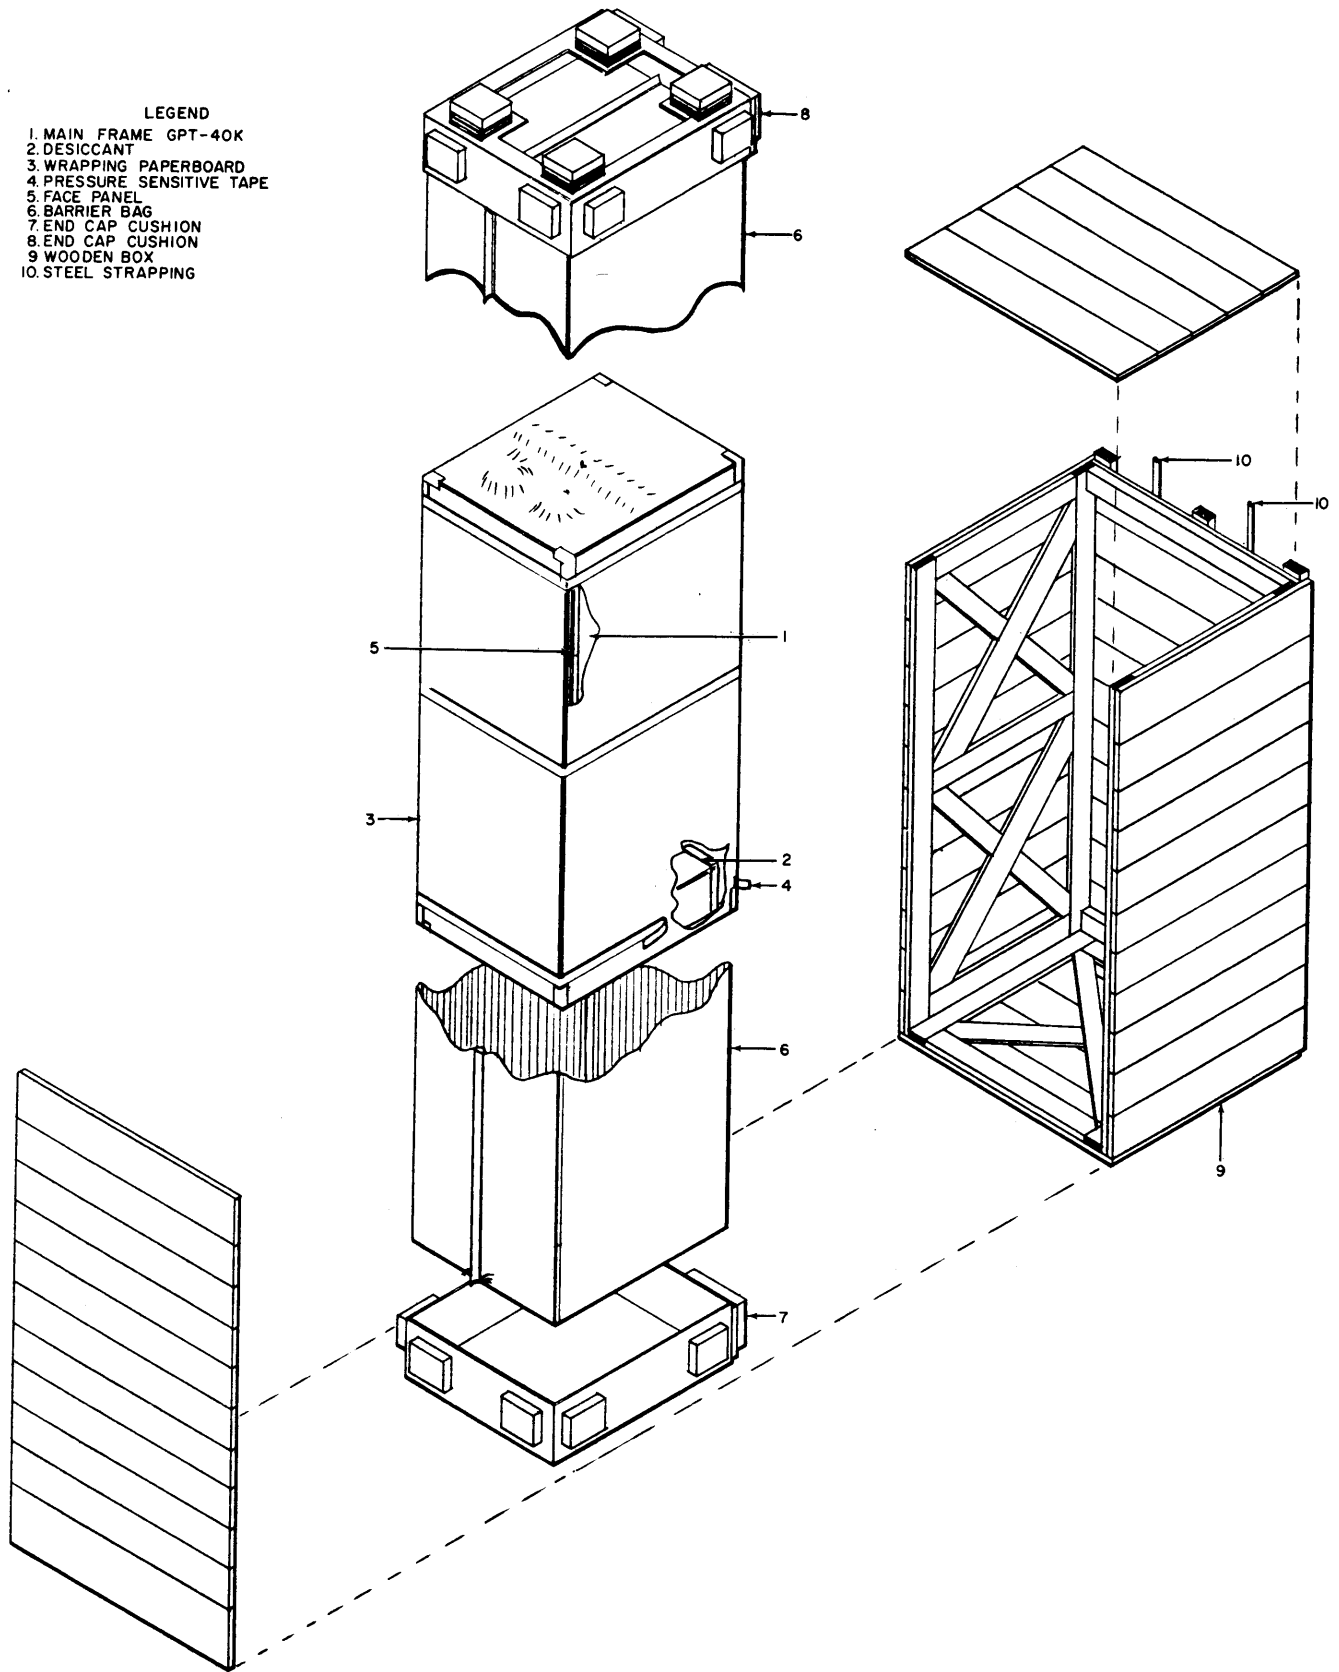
Typical Equipment Packaging (sheet 1 of 5)
